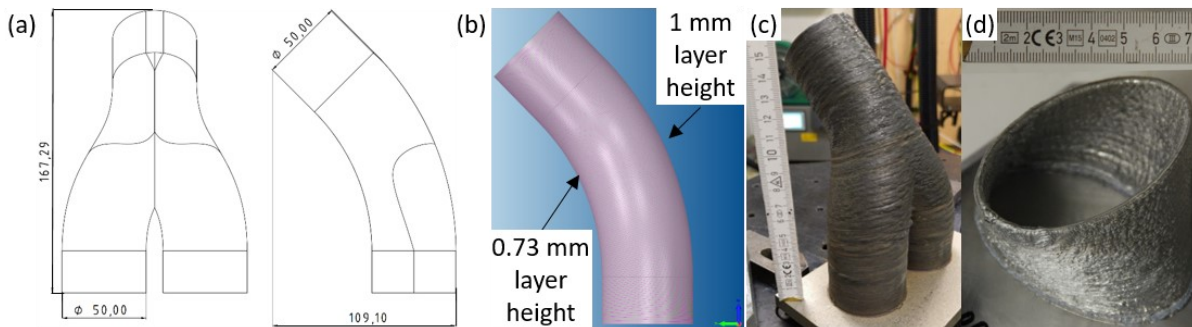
Sample parts produced using closed loop control: (a) Drawing of simplified manifold exhaust pipe, (b) CAD-model part made from DSS 2209 and (d) freeform part made from EN AW-6063 aluminum alloy.
